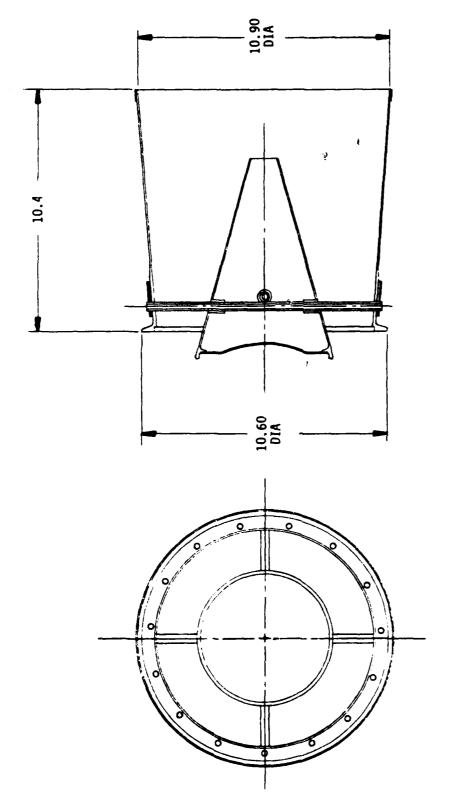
Power Turbine Containment - Combustor and Rear Bearing Support Housing.
